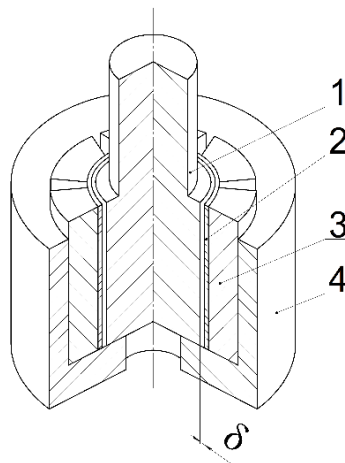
Equipment for diffusion welding of a cathode assembly:
